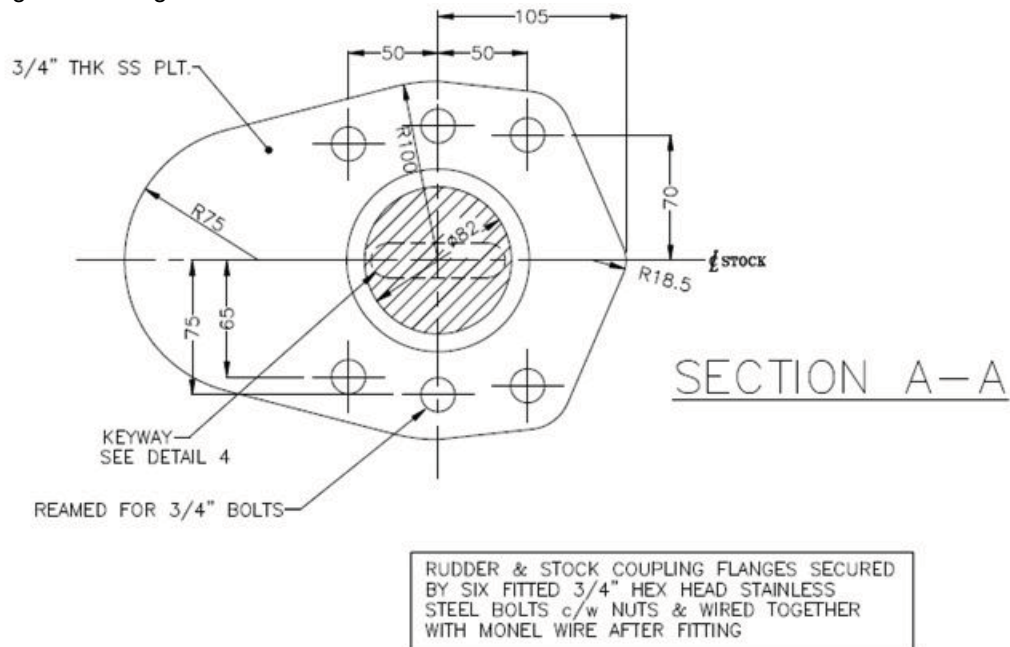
Fig. 3 – Rudder jumping collar flange drawing
